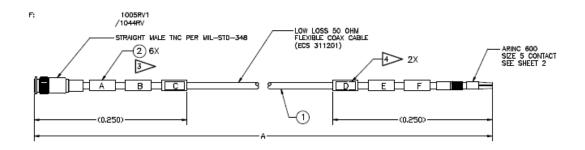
Coaxial Antenna Cable Outline Drawing (dimensions in [millimeters] and inches)
